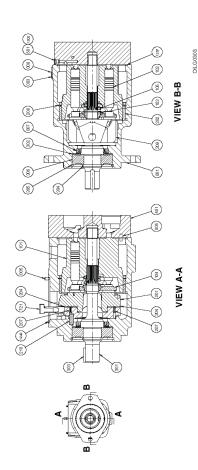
Cross section and plan view parts drawing, -064/-076/-098/-130 C-Frame (520024-301 sheet 1 of 4).
